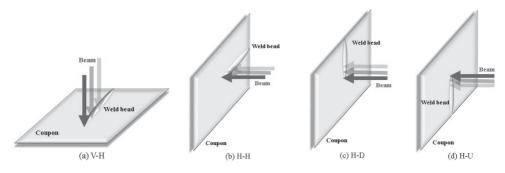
Schematic layouts of combinations of a generator position and a welding direction. (a) V-H: the vertical generator position and the horizontal welding direction, (b) H-H: the horizontal generator position and the horizontal welding direction. (c) H-D: the horizontal generator position and the downward welding direction, and (d) H-U: the horizontal generator position and the upward welding direction.
